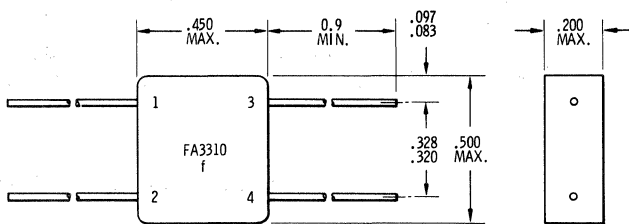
ENCAPSULATED MATCHED QUAD PACKAGE DIMENSIONS.
